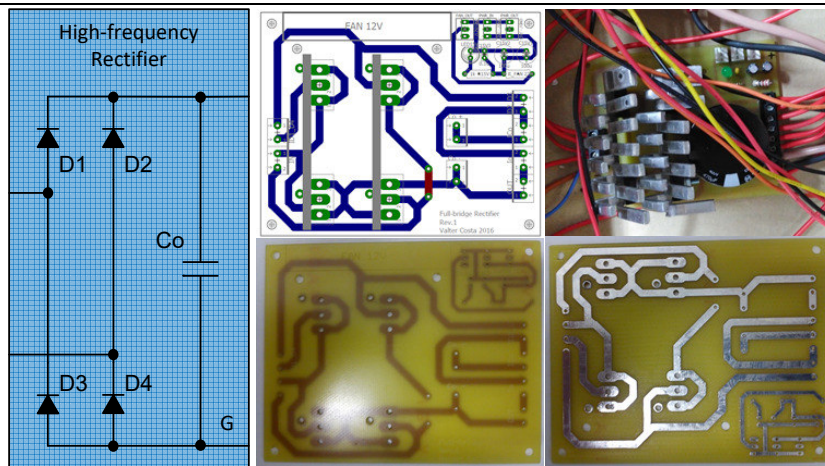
High-frequency Full-Bridge rectifier PCB prototype (100 x 80 mm), Board design; PCB Top and Bottom Layer and PCB full assembly
